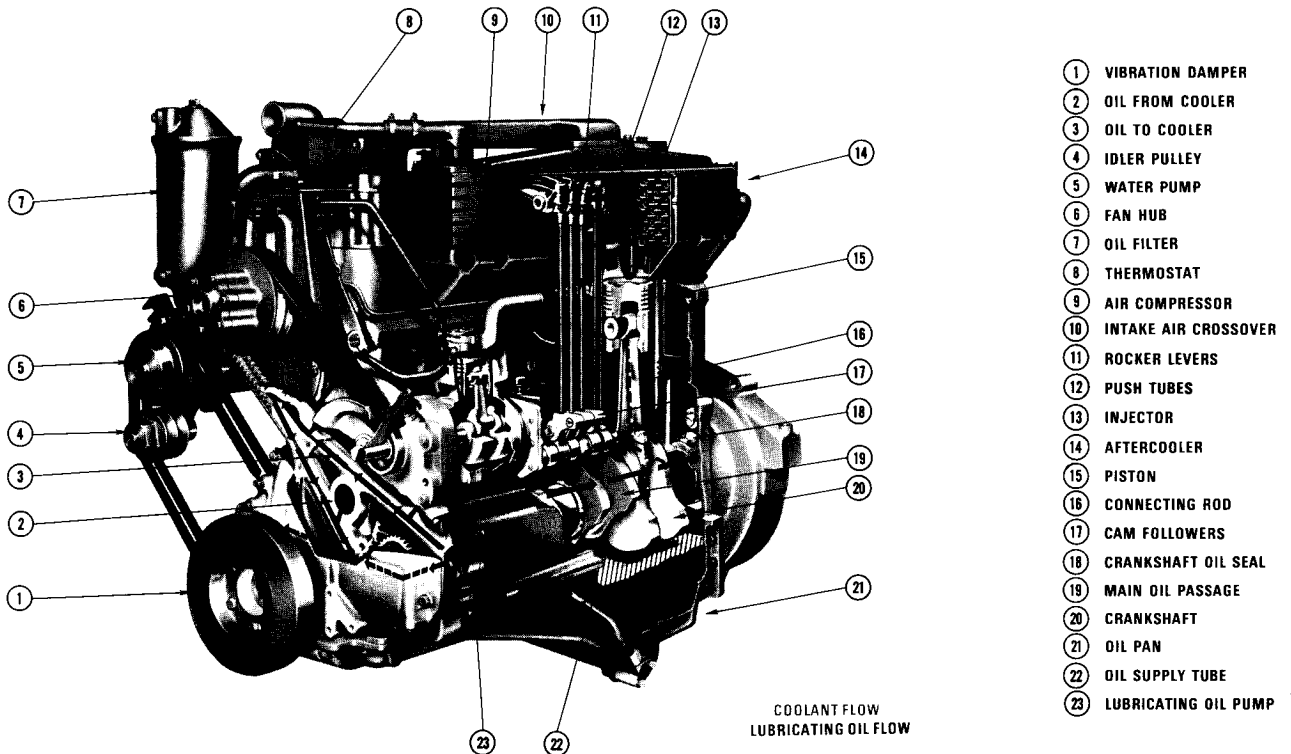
, (LWC-22). Coolant and lubricating oil flow — NTA Engine
